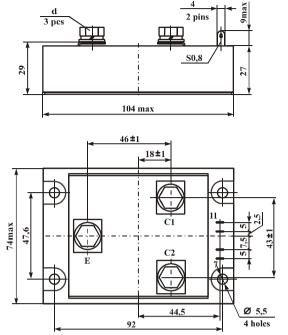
Overall drawing of modules M12.1-50(100,150,200)-12-01
